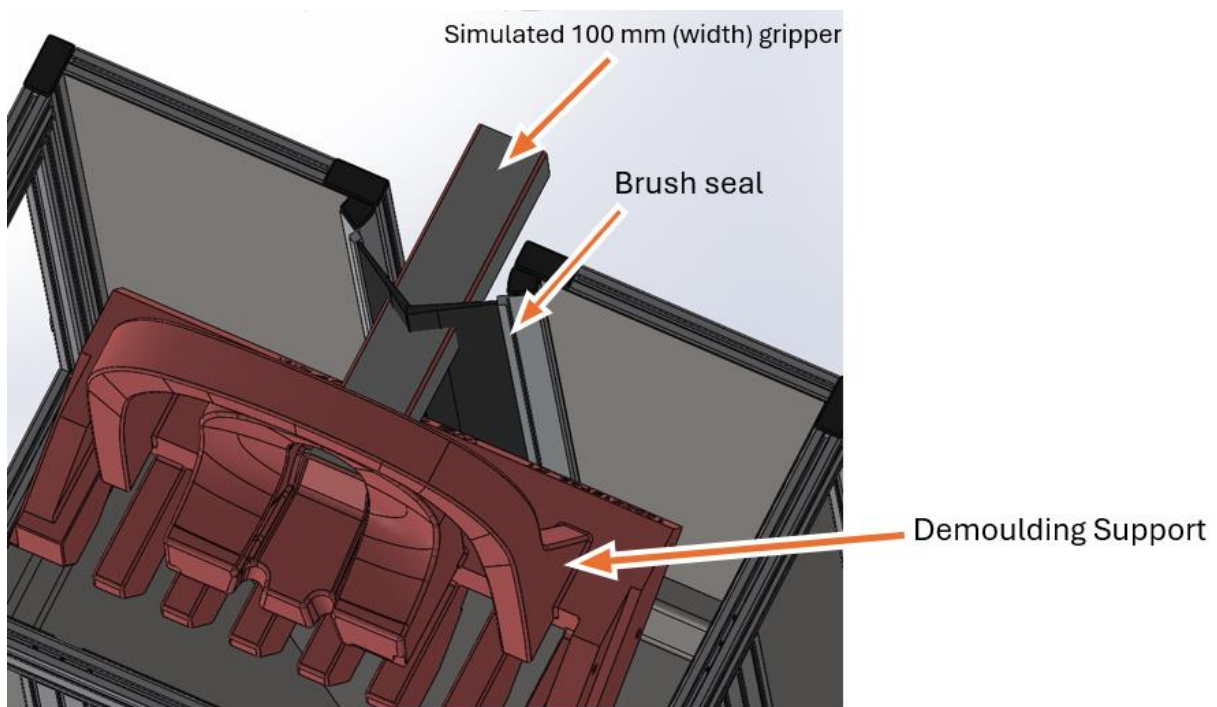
Final implementation with 30° Item profiles, showing demoulding support gripper integration.
